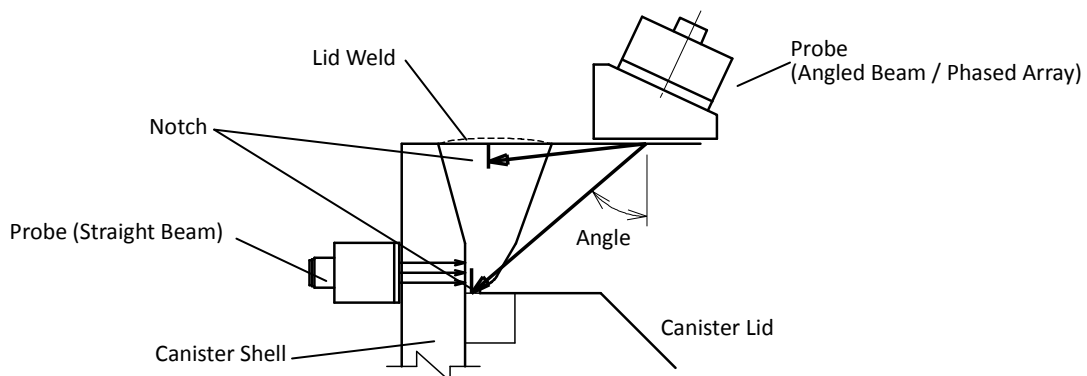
Layout of the EDM notches and the probes for UT measurement of the lid weld
